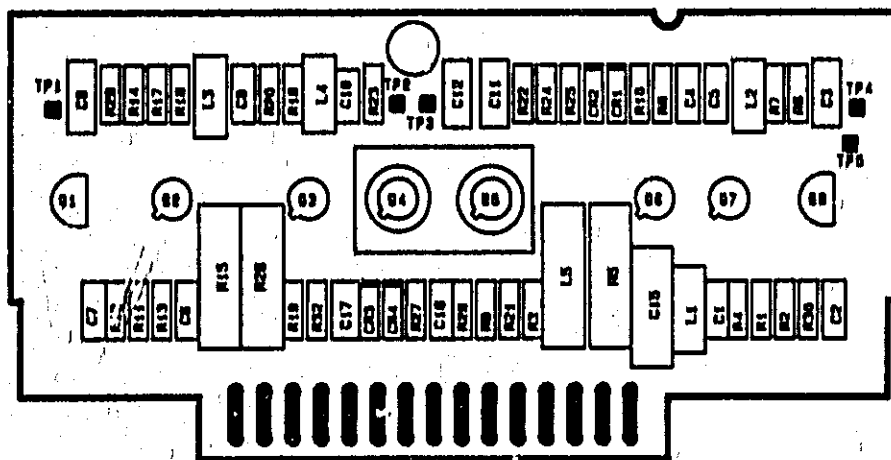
A9 Mixer and Integrator Assembly Component Identification (CHANGE 6)
